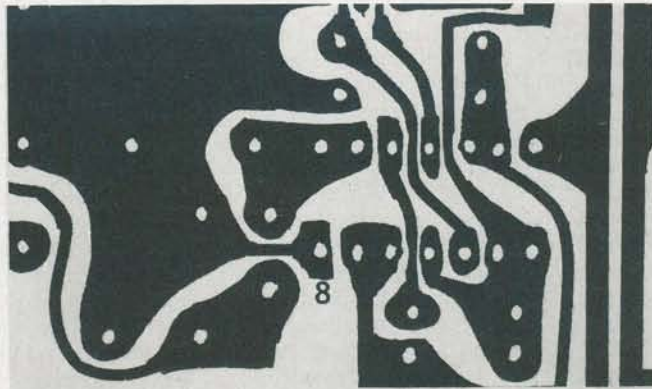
IF TRACES MUST BE ROUTED between IC pads, elongate the pads to make soldering the components easier later on.
